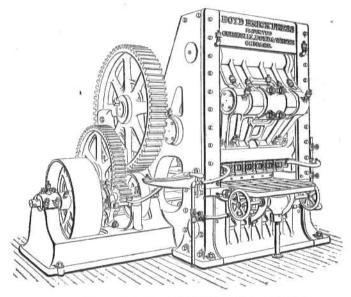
SIX-MOLD DRY-PRESS BRICK MACHINE.
